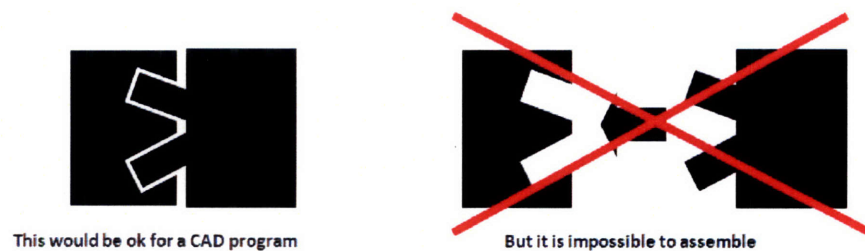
the design on the left is valid for a CAD program but it is impossible to assemble
